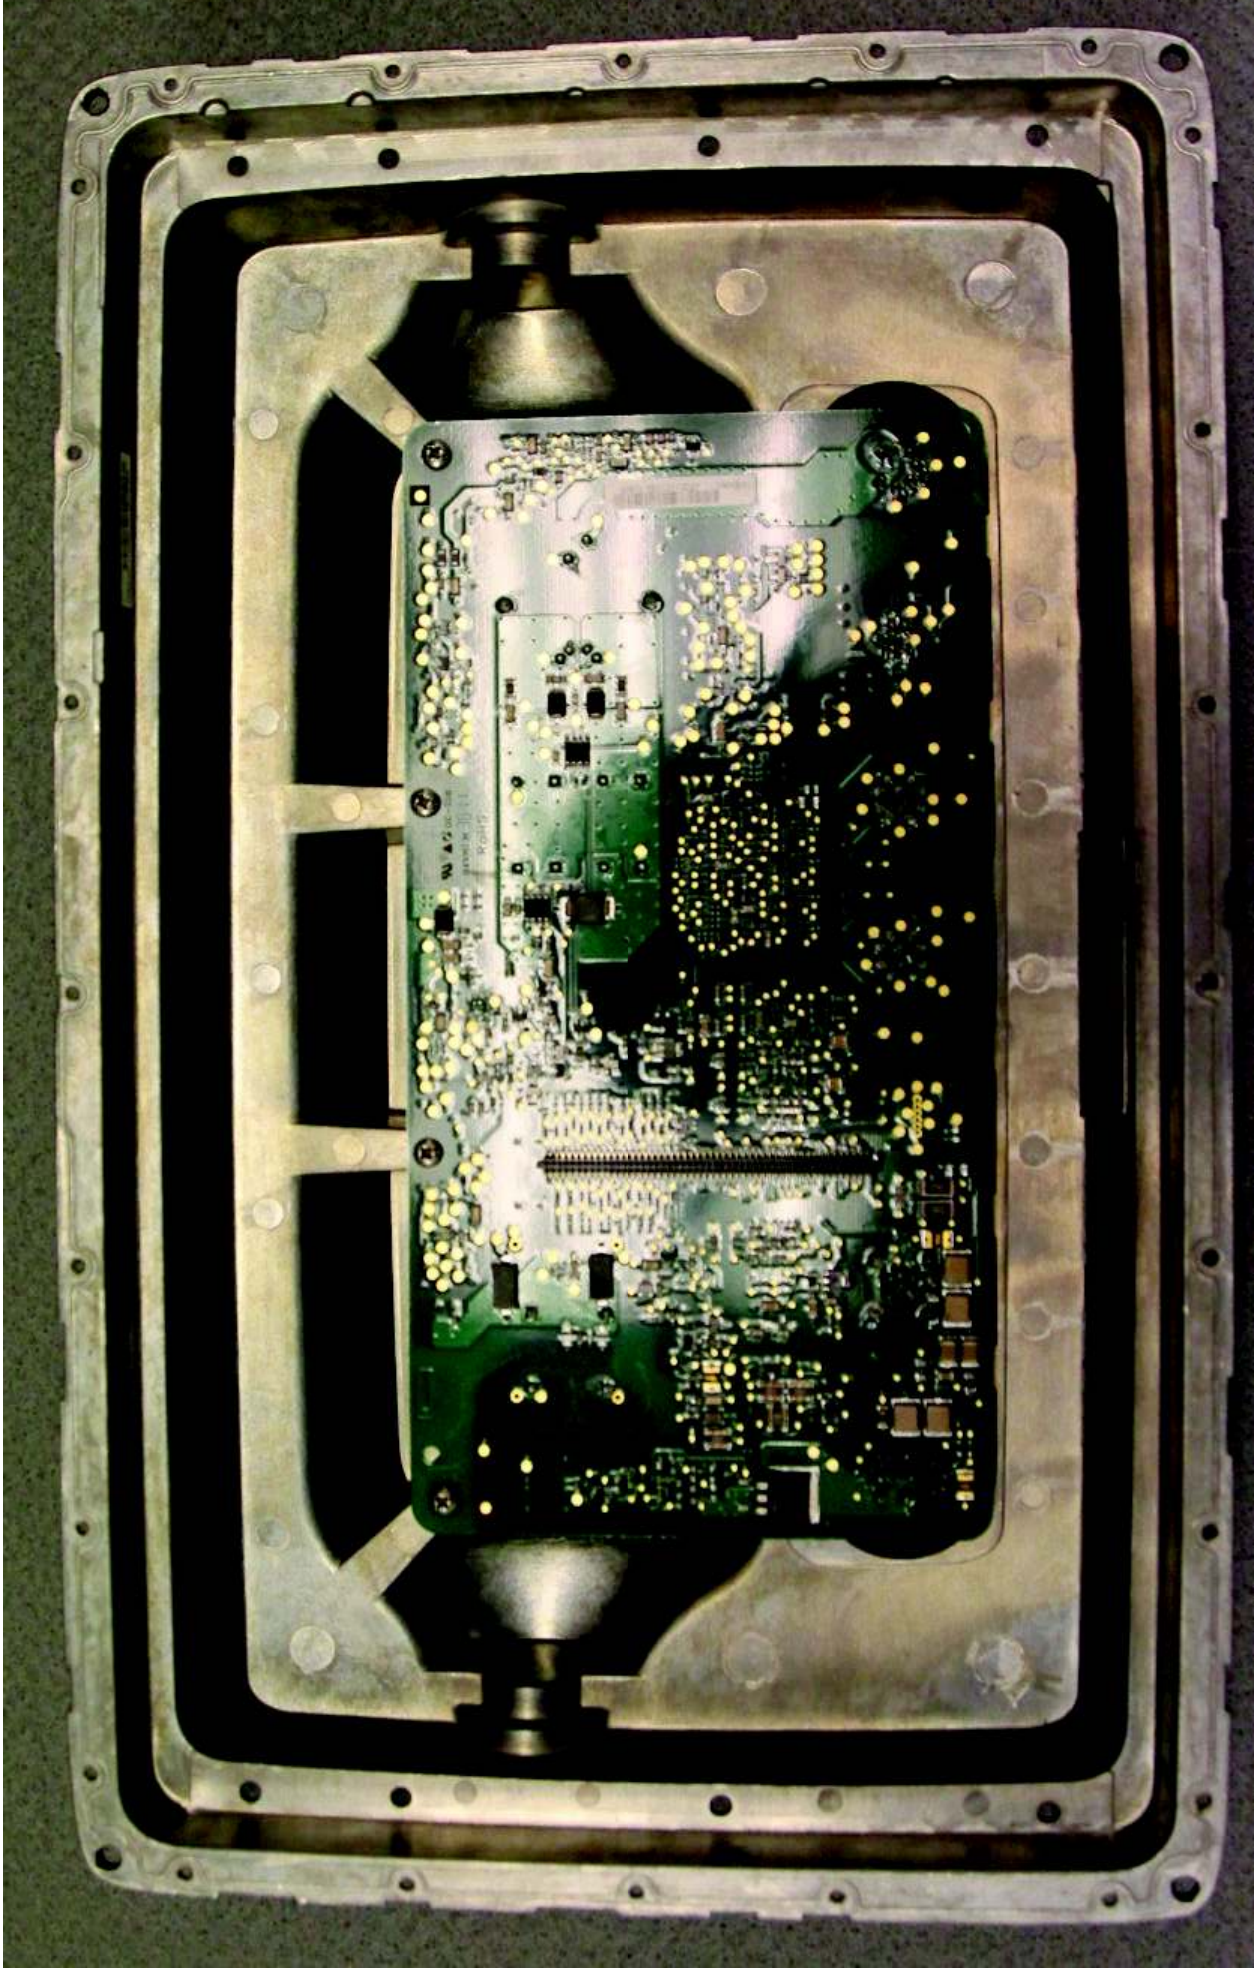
Inside of 12 inch rear casting showing connector / sonar board
